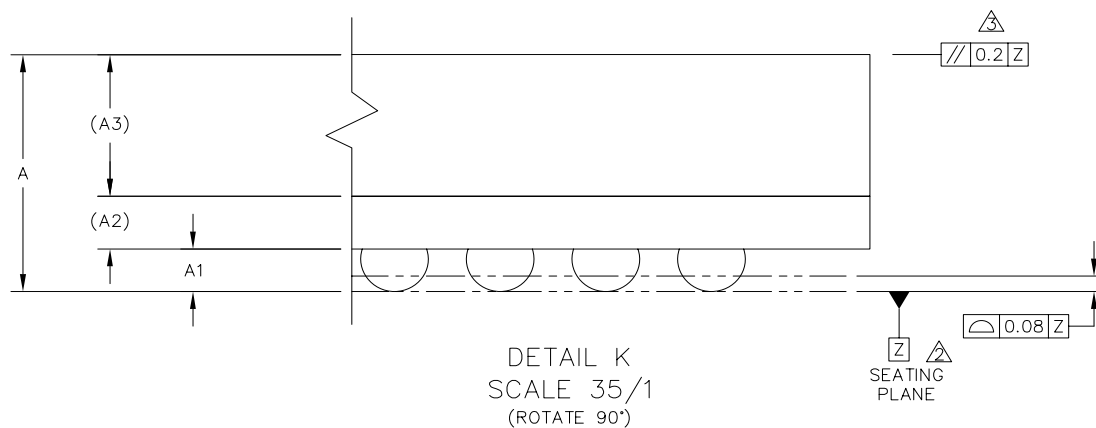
100-Pin Ball Grid Array (BGA) Package Drawing, Part 1
